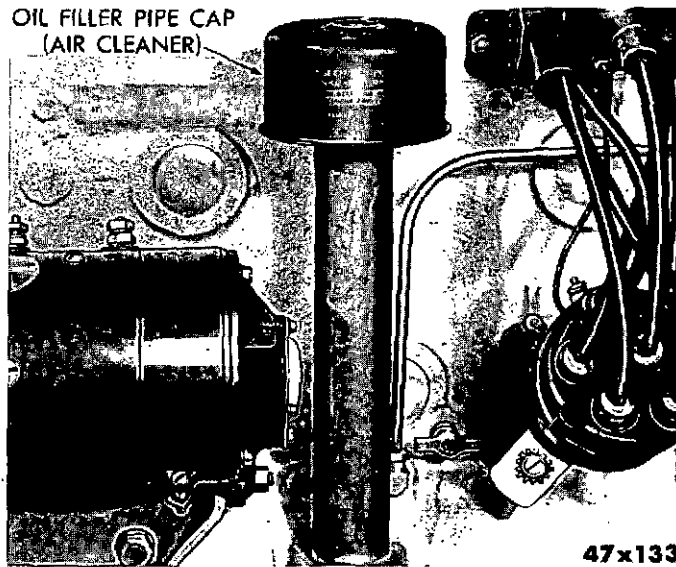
Oil Filler Pipe Air Cleaner (Typical)
